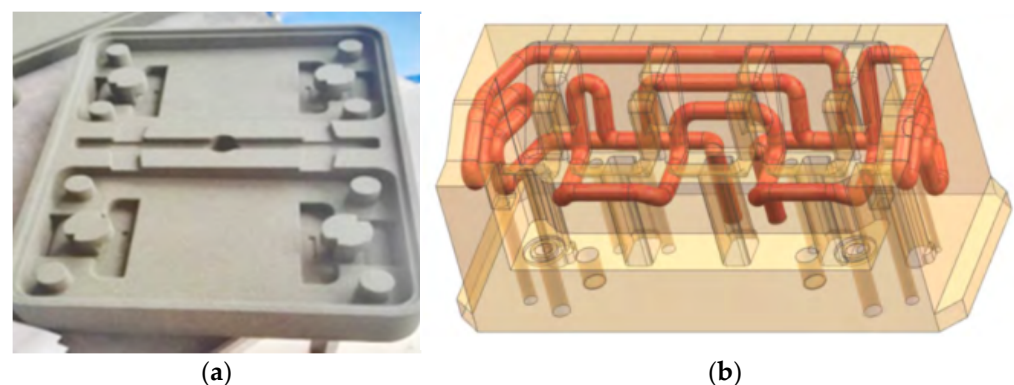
Three-dimensional printed sand-casting moulds: (a) 3D printed moulds for fastener steel plate; (b) schematic smart moulds with embed complex cooling path. Retrieved from [81].
